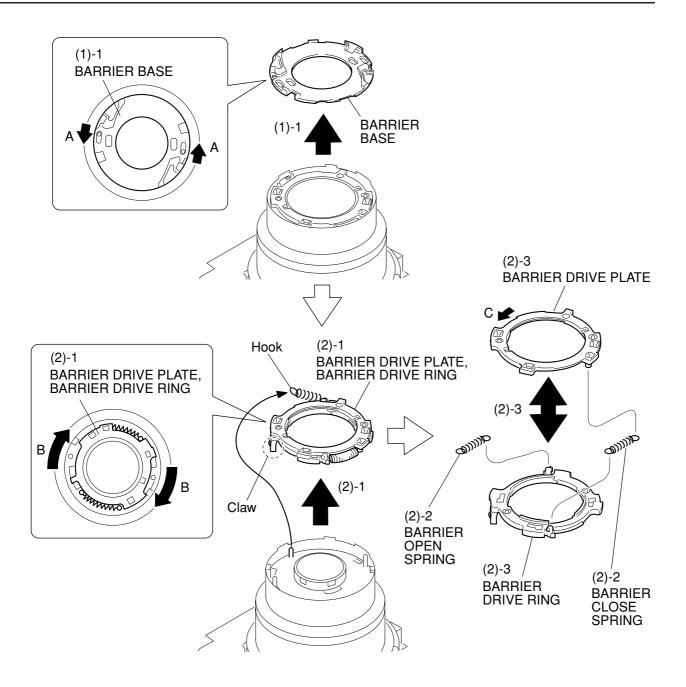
BARRIER BASE, BARREL DRIVE PLATE, BARRIER DRIVE RING
